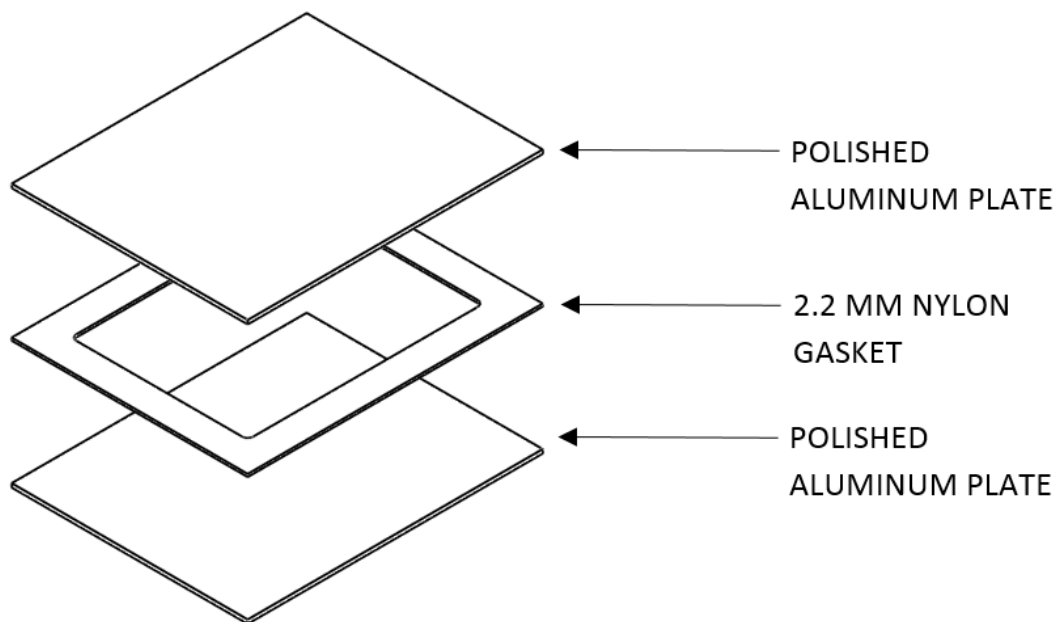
Diagram of PVA injection sheet mold. Not shown is the steel binding clamps used for mold closure.
